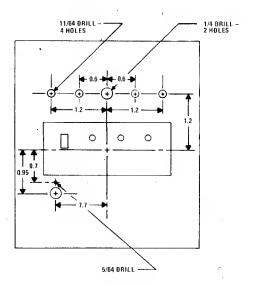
Drilling Guide for the Case Top if the MRC-1-10 Rotary Function Switch is Used. (Dimensions in inches.)
